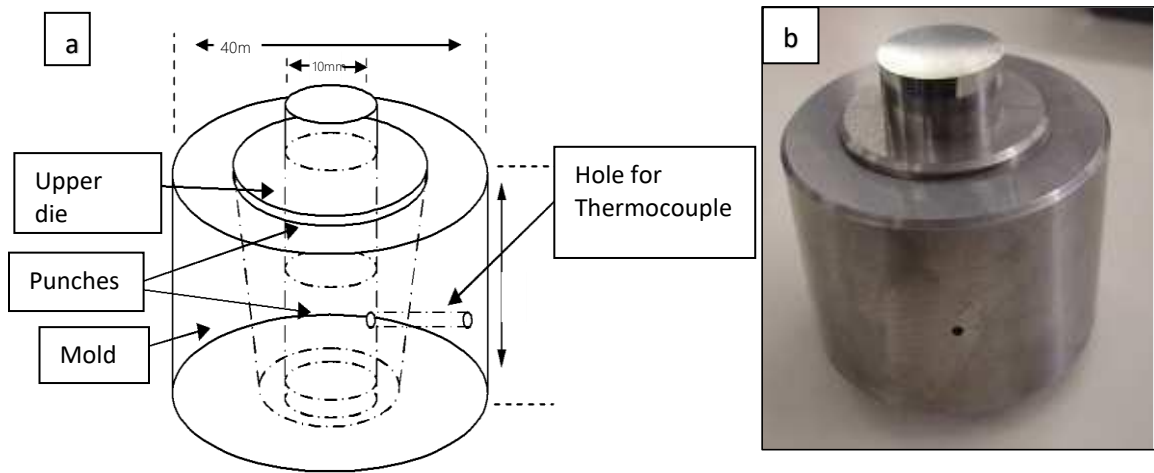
a) Schematic diagram of the mold set design, b) The fabricated mold set.
